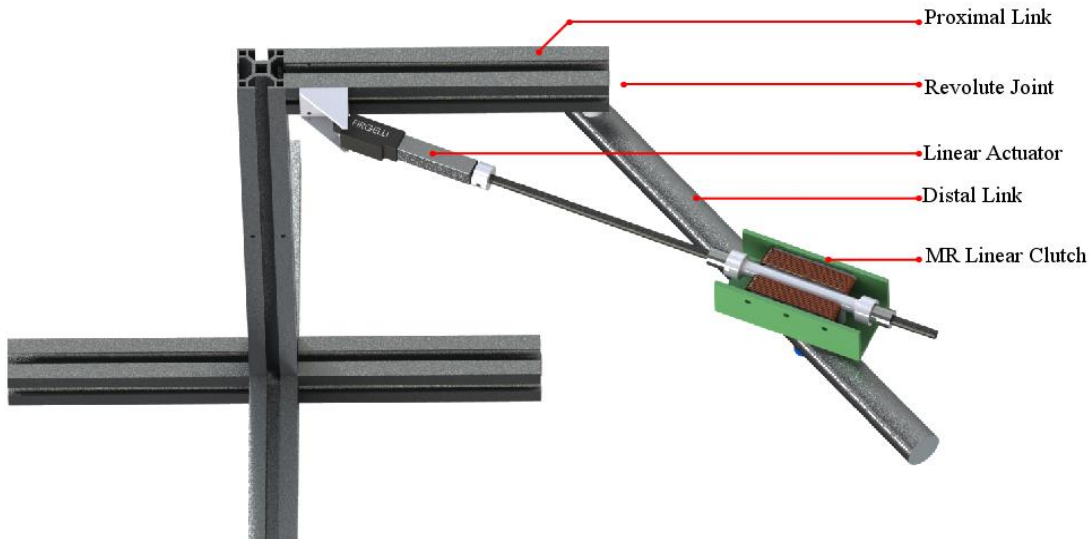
CAD model of the experimental Setup. MR linear clutch is used in a revolute joint actuated by a linear actuator
